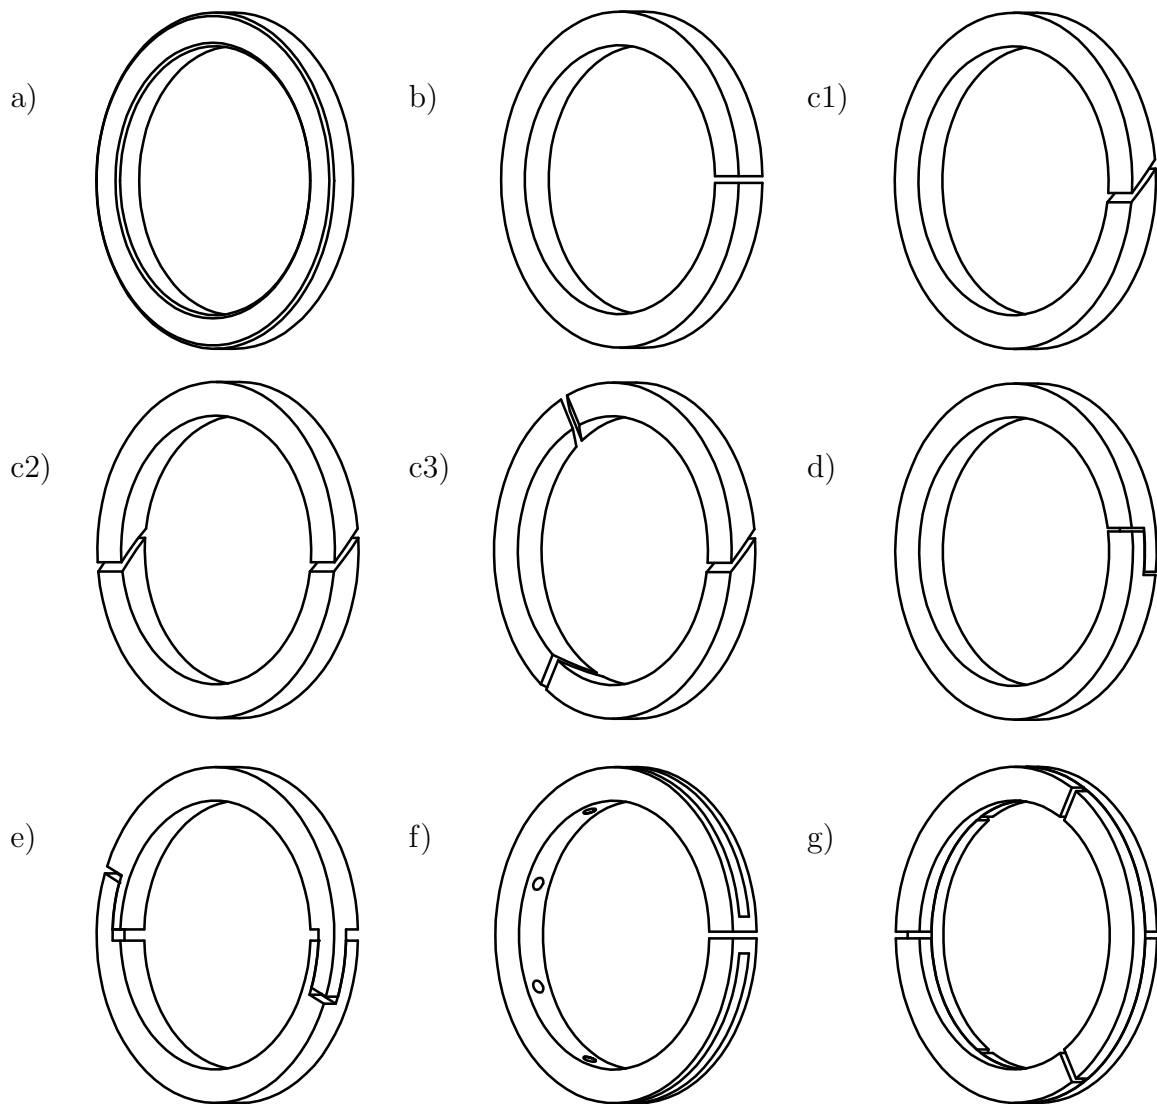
Piston ring designs: a) uncut ring, b) one piece radially straight-cut ring, c) angle-cut rings: c1) one piece, c2) two piece or c3) three piece design, d) one piece overlap/step-cut ring, e) two piece gas-tight cut ring, f) radially straight-cut ring with pressure-balancing groove, g) radially straight-cut ring pair.
